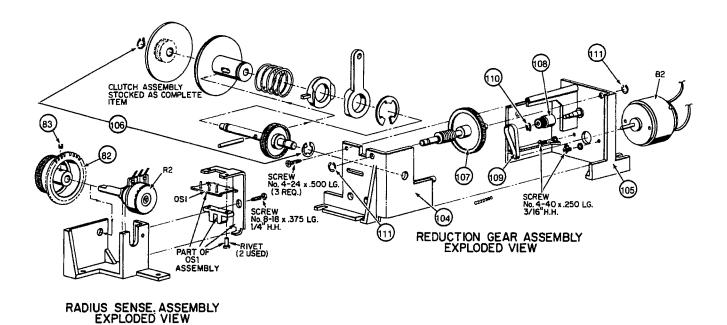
Radius Sensor And Reduction Gear Assembly Exploded View
